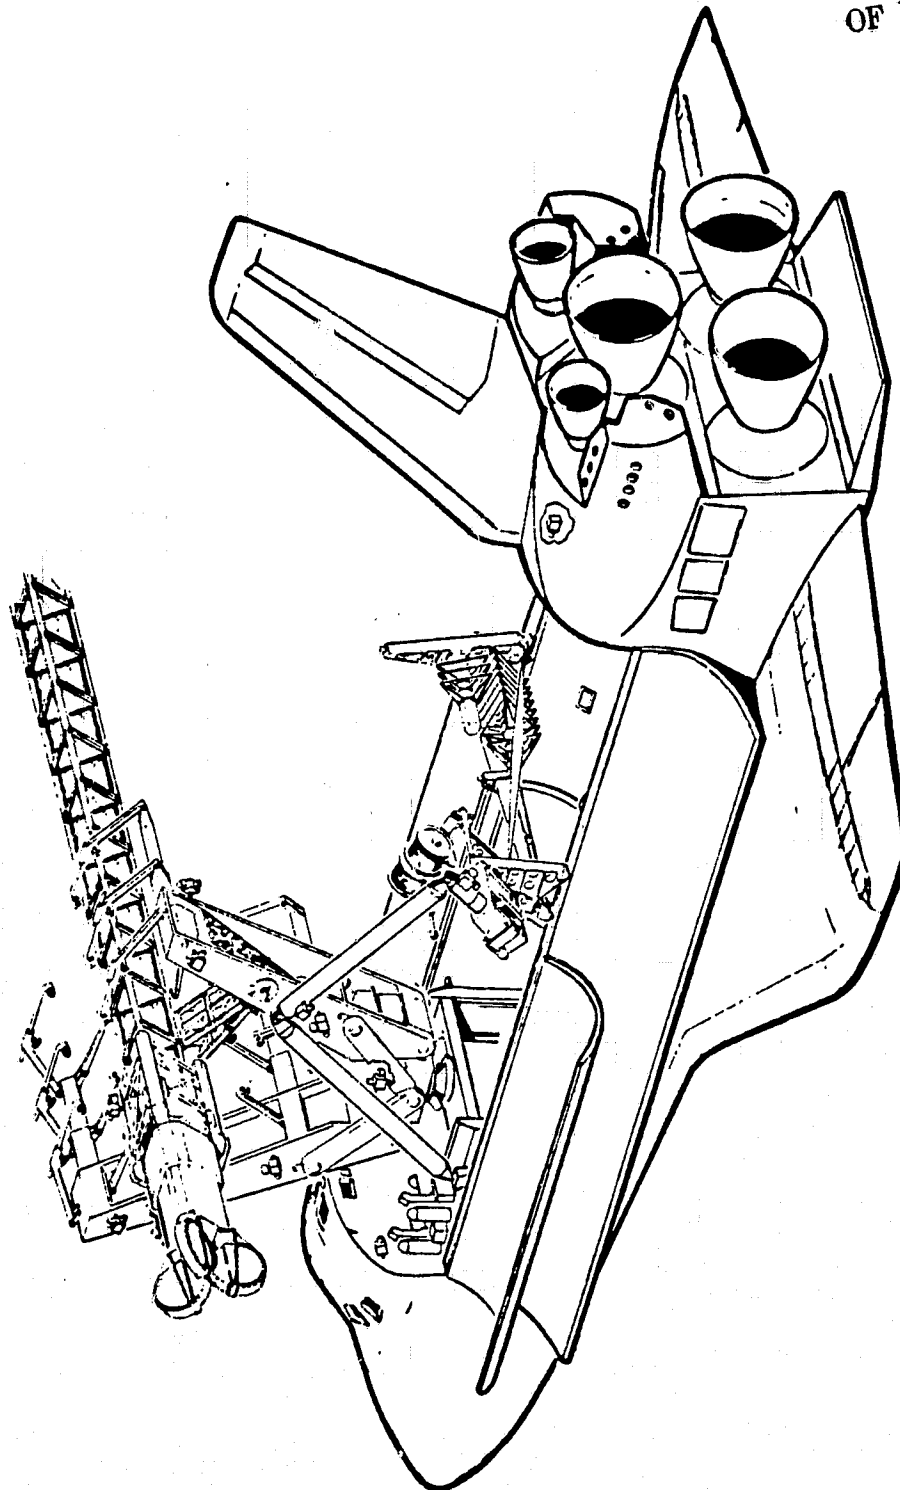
Fabricating the First Longitudinal Beam
